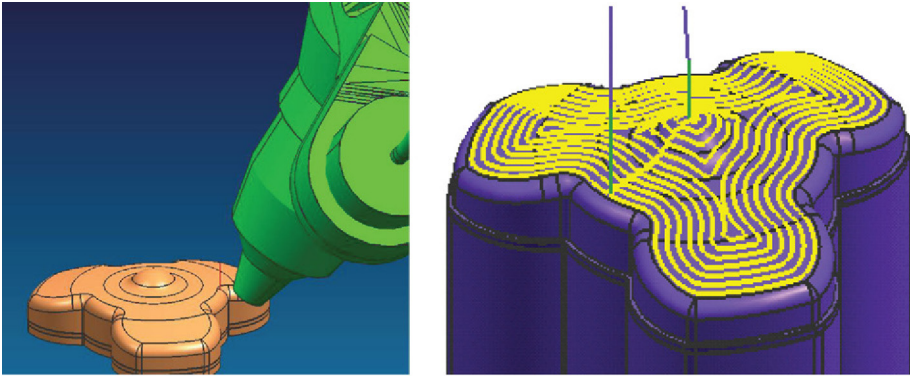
Left: CAD model of the part and process head. Right: Simulated toolpath for 5-axis deposition using DMDCAM software. (Courtesy DM3D Technology.)
